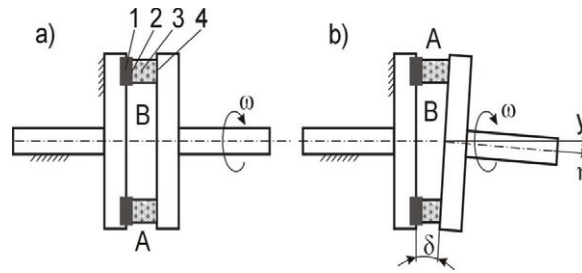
A face contacting seal. 1 – stator, 2 – sliding surfaces, 3 – rotor, 4 – fastening surface
